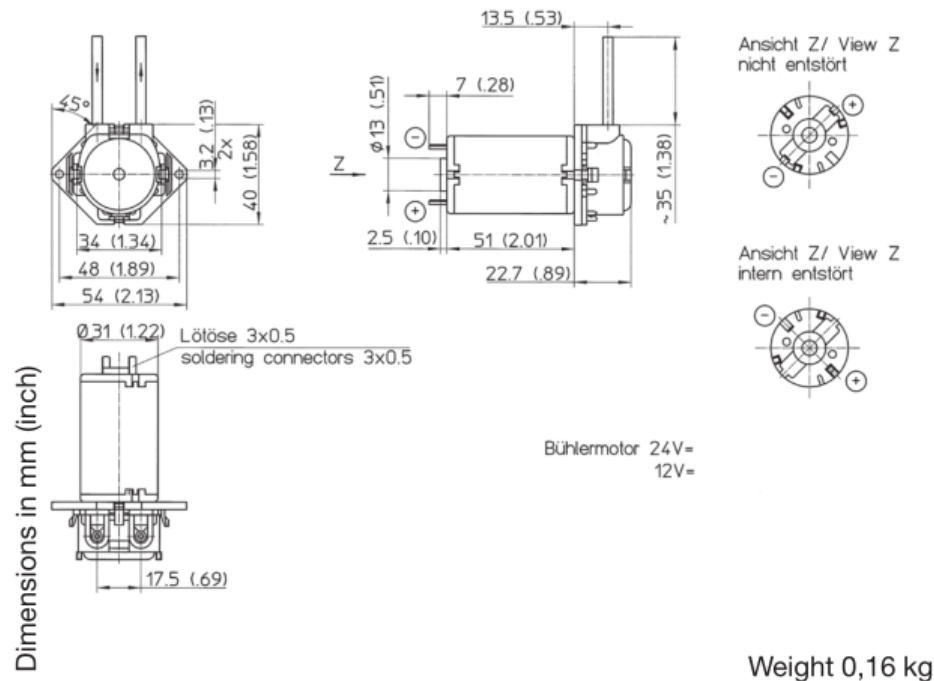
Multiview Schematic Drawing of SR10/30 DC Straight Flange Pump [20].
